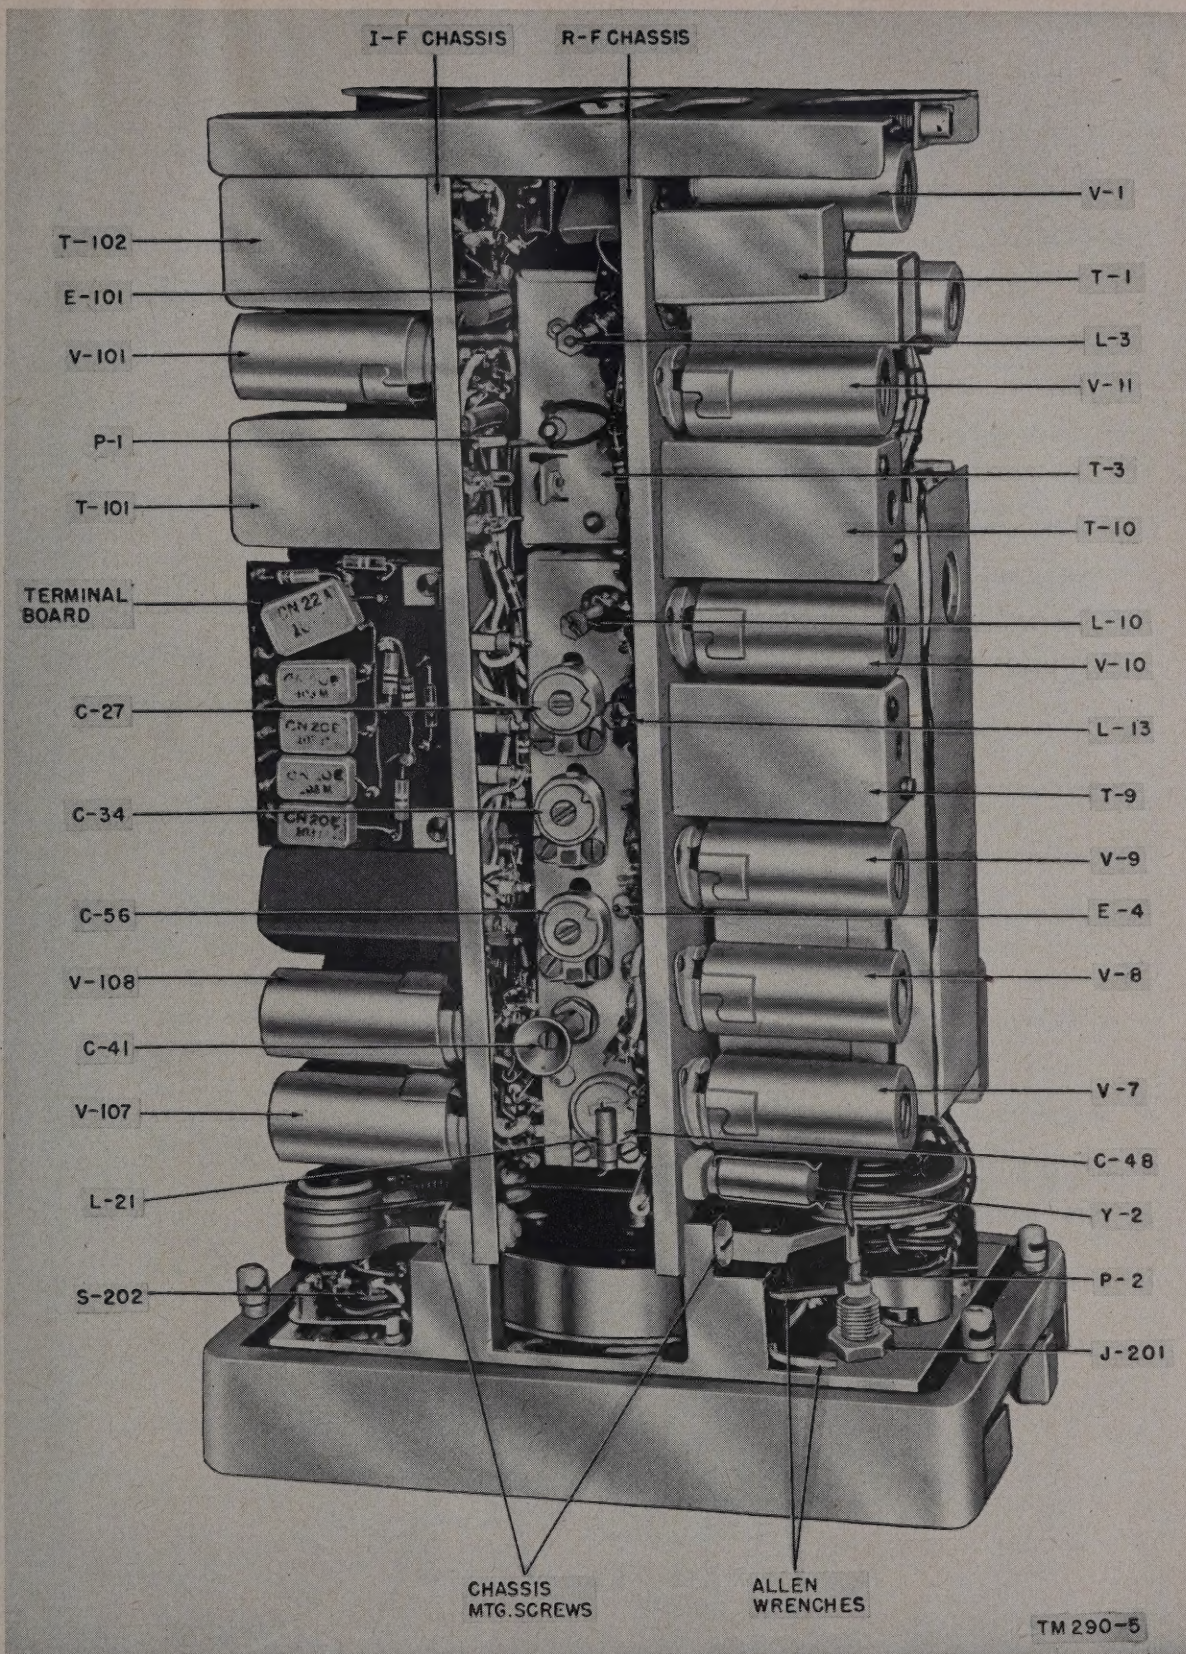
Receiver-Transmitter RT-70/GRC, top view of panel-chassis assembly.
